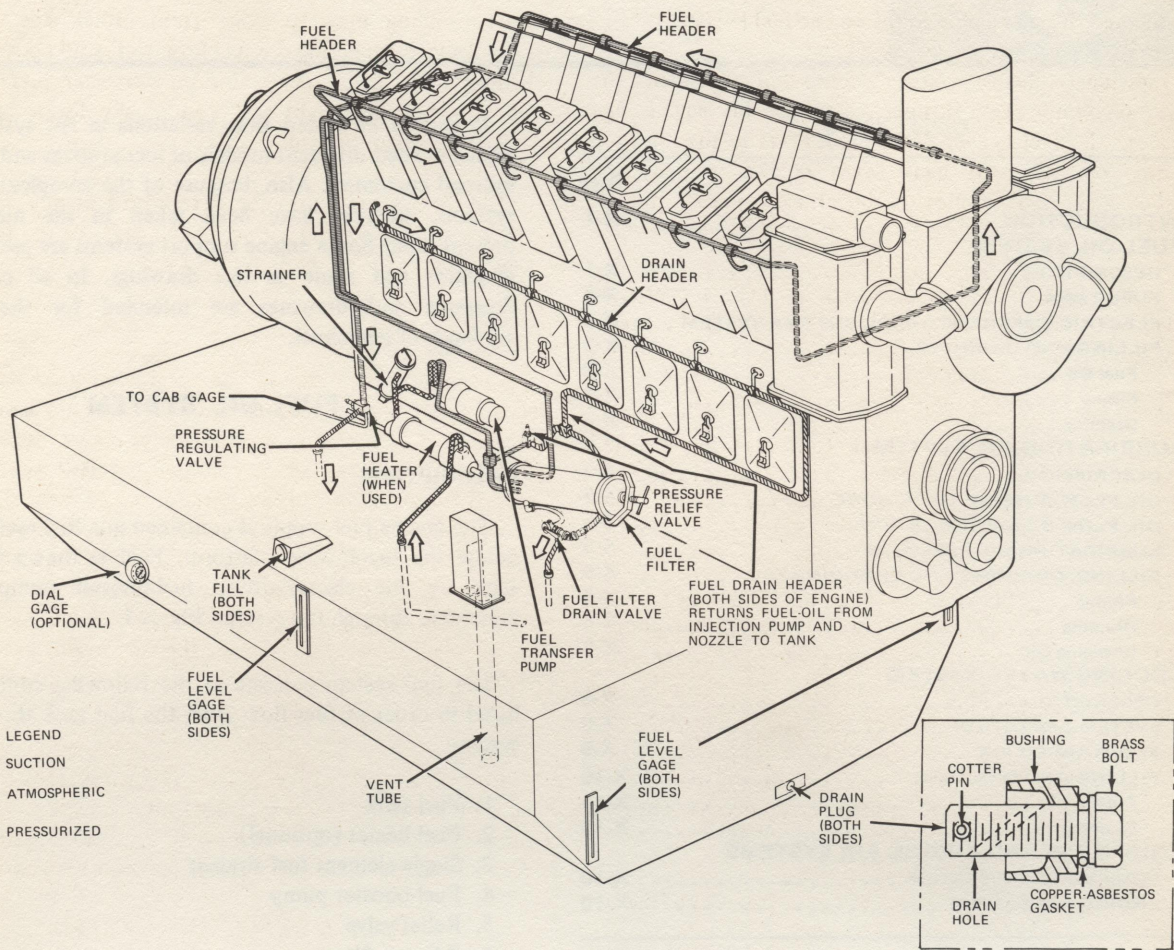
DIESEL ENGINE FUEL-OIL SYSTEM (TYPICAL).
